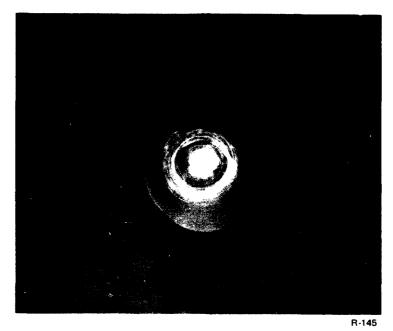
Typical ball removed from a noisy bearing showing band of circular scratches x 1
